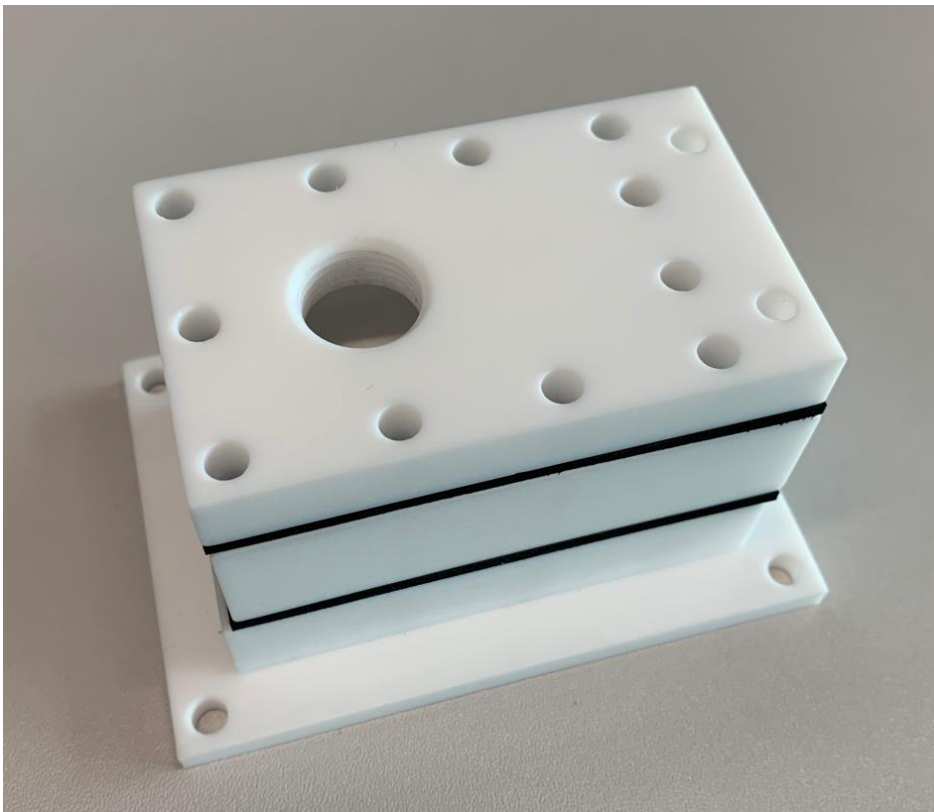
Prototype condensing engine slide valve shown as an assembled unit (without bolts and pipe connections).
